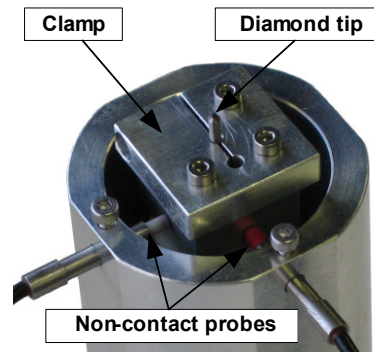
A clamp holding the tool shank is mounted to the free end of the PZT.
